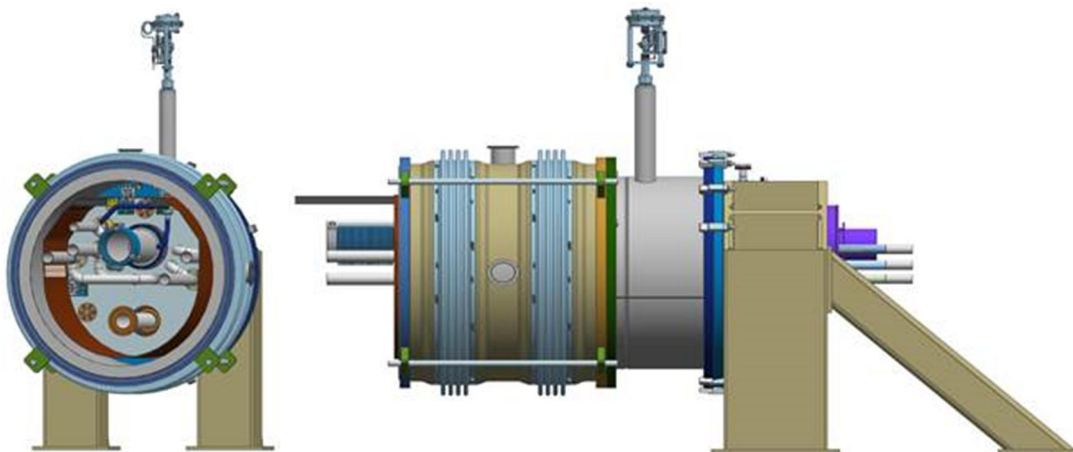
Injector feed cap, end view (left) and side view (right)
